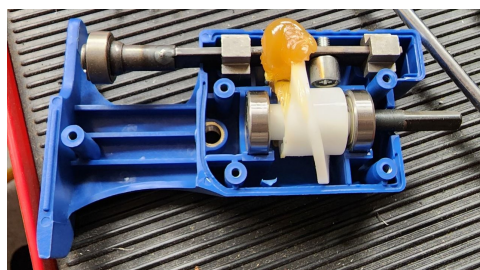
Barrel cam inside the reciprocating saw adaptor unit
